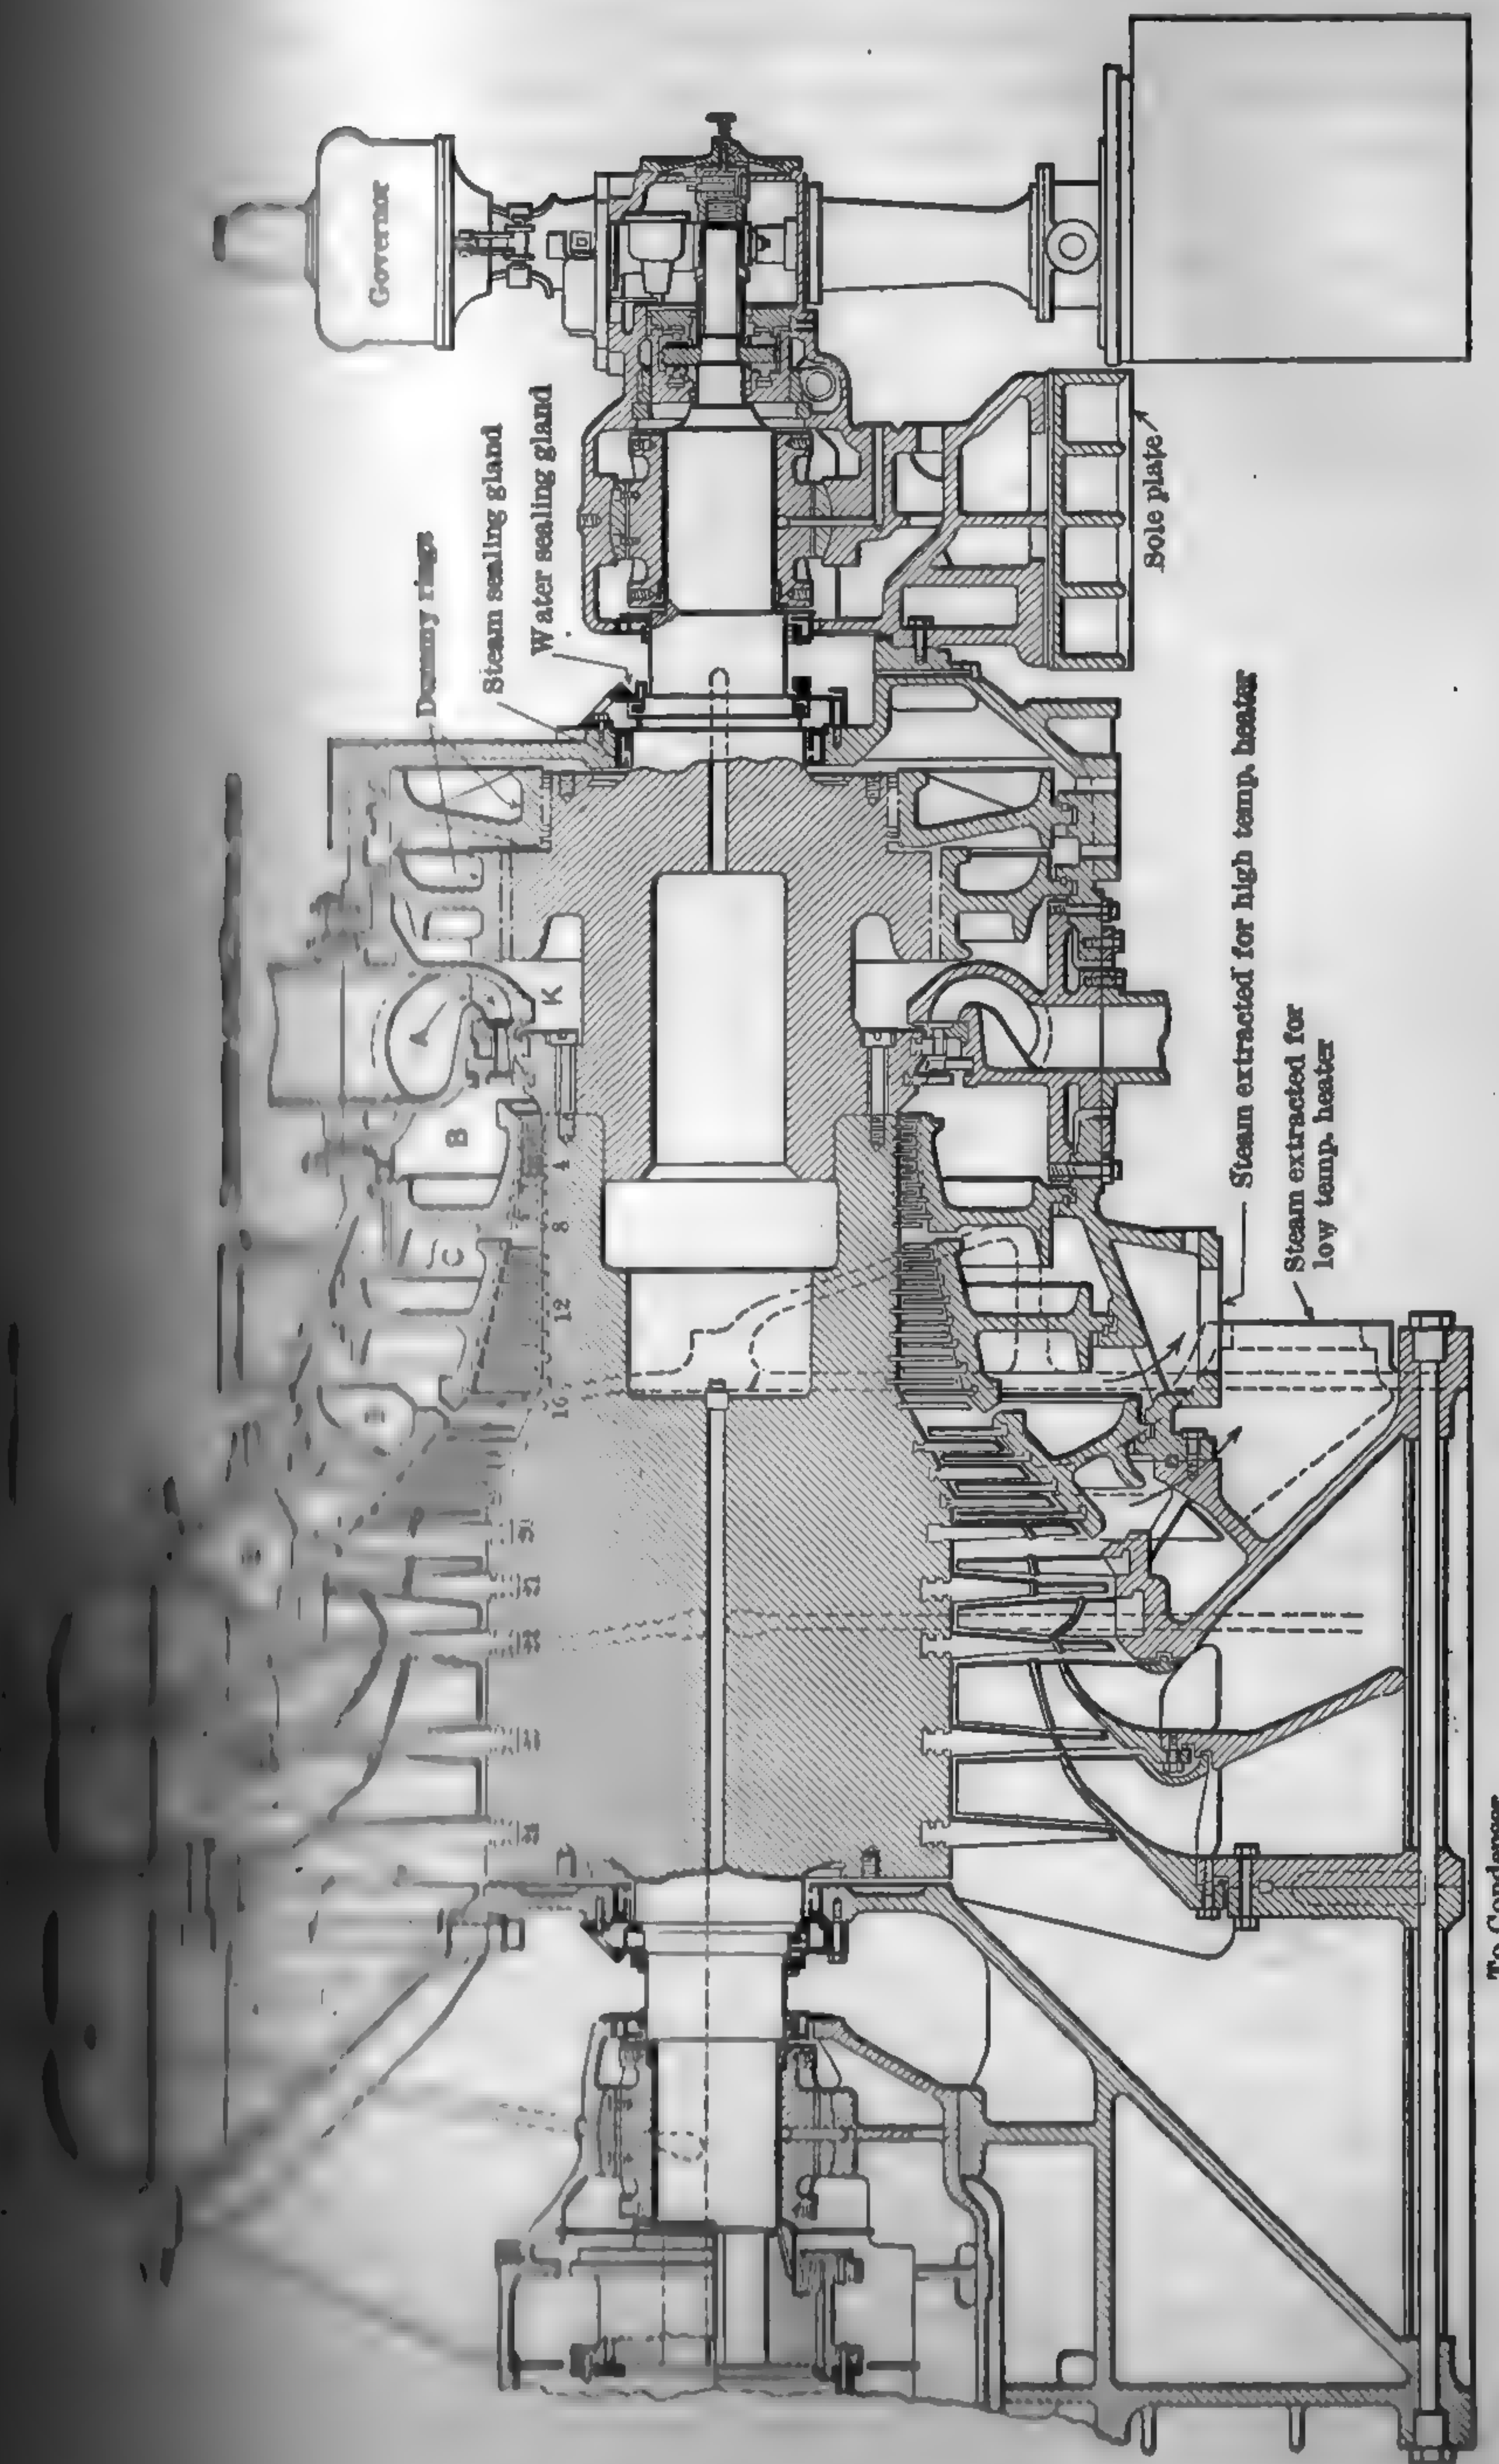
Assembly of 25,000-kw. Westinghouse High-pressure Single-cylinder Condensing Turbine.
